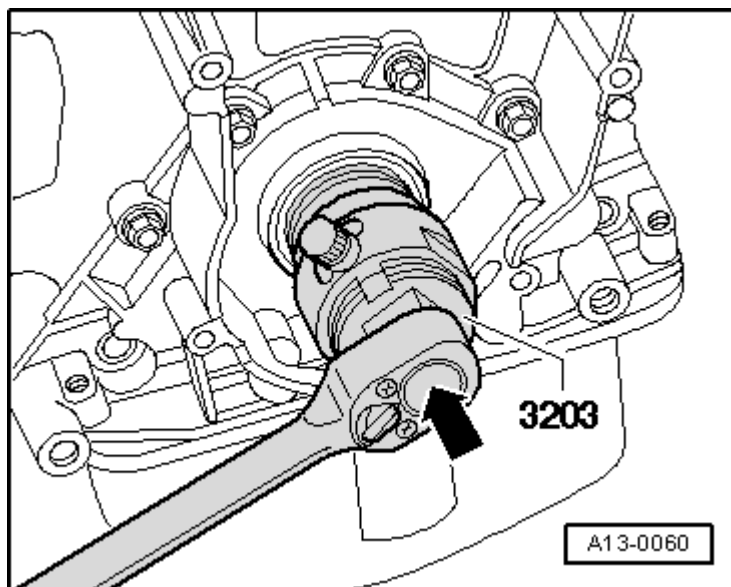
Identifying Firm Pressure Exerted To Oil Seal Extractor 3203 Into Oil Seal
